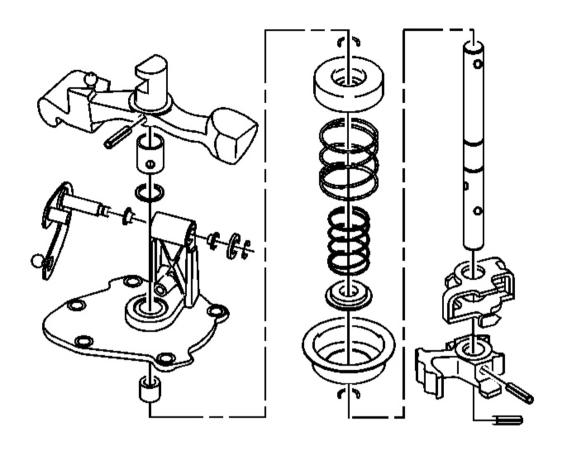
Shifter Disassemble & Components Courtesy of GENERAL MOTORS CORP.
